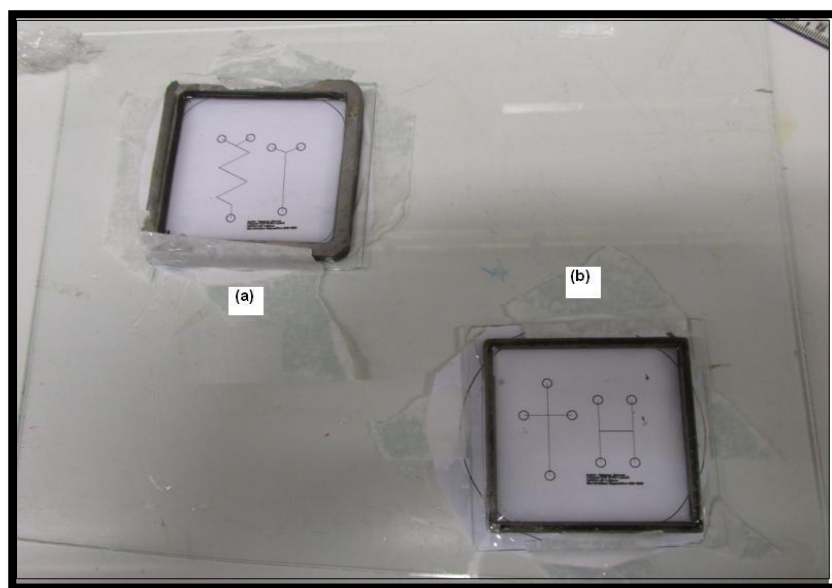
Flat molds: (a) and (b) square metallic molds, each containing a glass slide with printed design on paper and placed in the bottom part of the mold.
